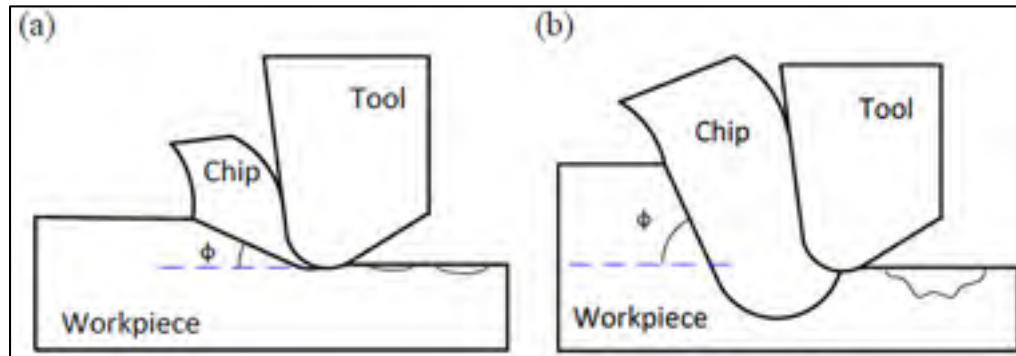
Illustration of chip formation and machined surface defects for (a) low and (b) high cutting feeds
